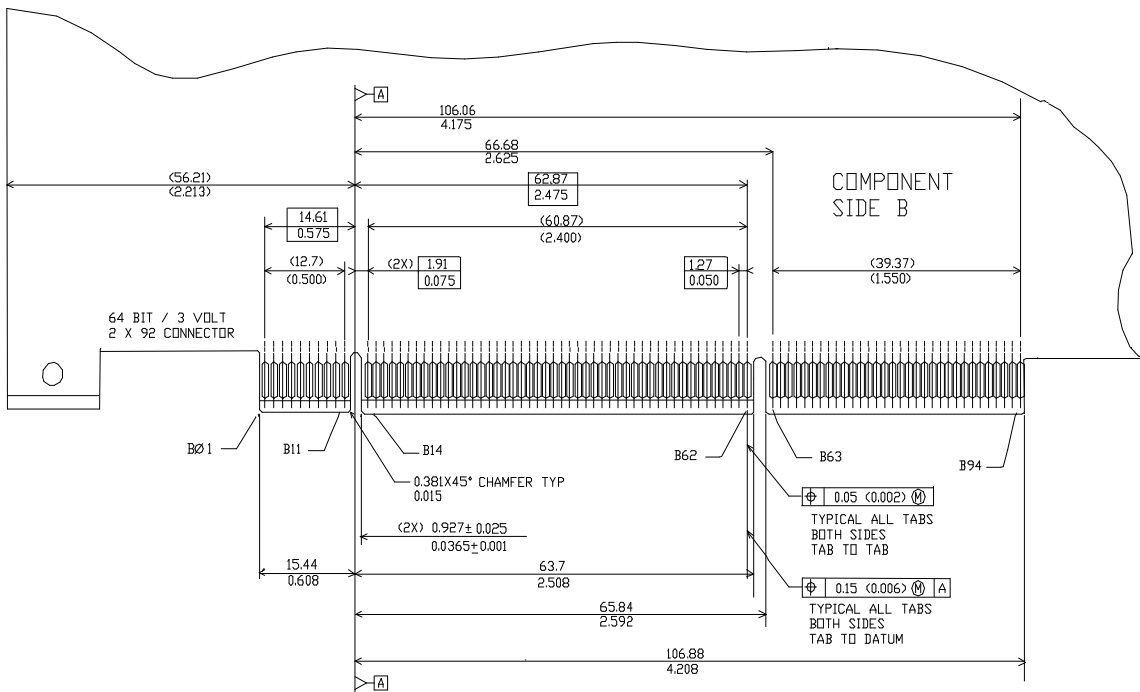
3.3V/64-bit Card Edge Connector Dimensions and Tolerances
